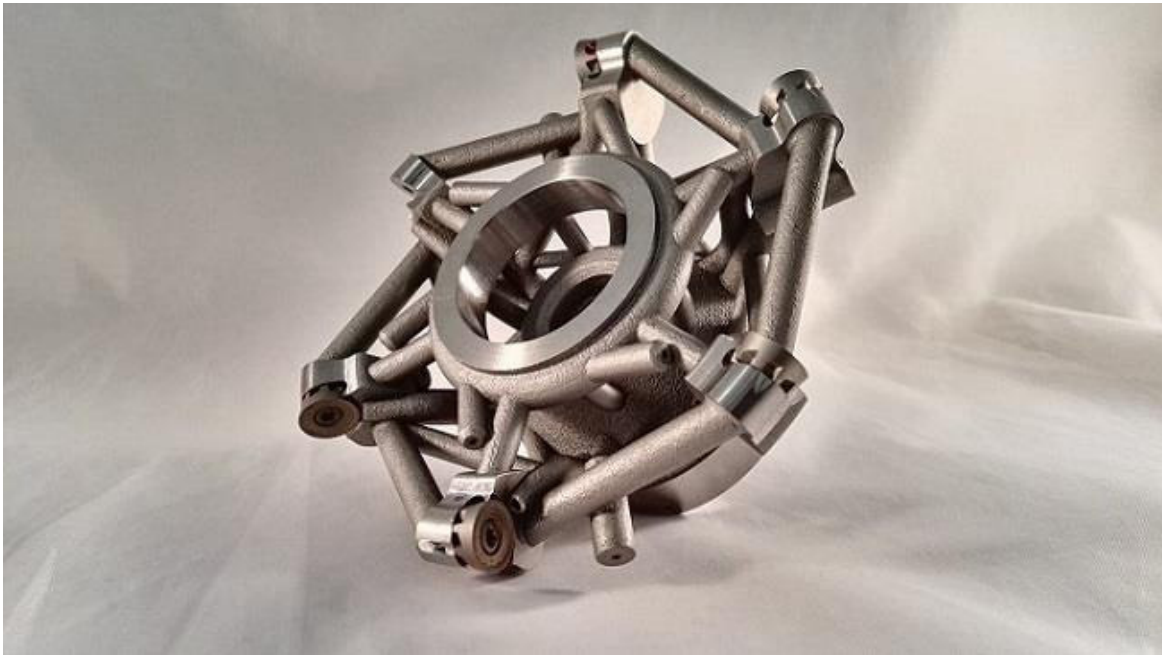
Special light milling head produced by 3D metal printing [37]
